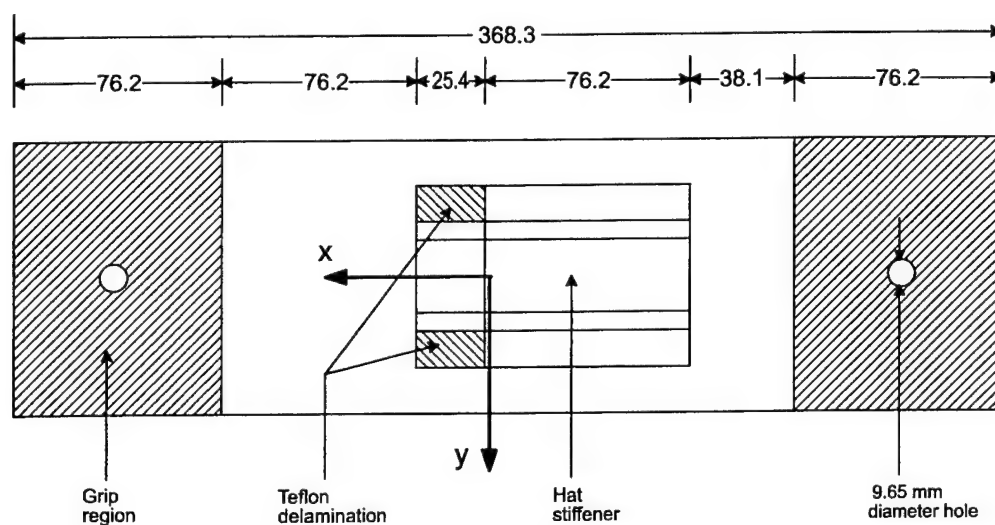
SKIN-STRINGER GEOMETRY FOR TENSION SPECIMEN
